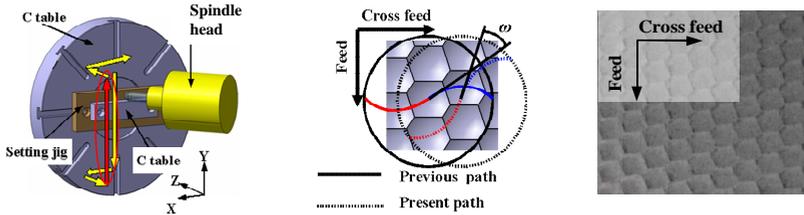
shows a tool path to generate a dimple aligned surface by adjusting path length of air cur in ball end milling and a photo of machined surface with dimples.
